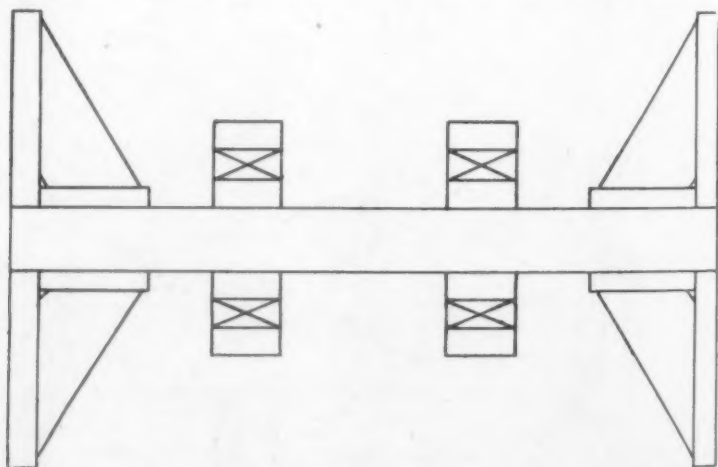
CENTRIFUGAL CASTING UNIT DESIGNED FOR POURING A CASTING FROM EACH END.
